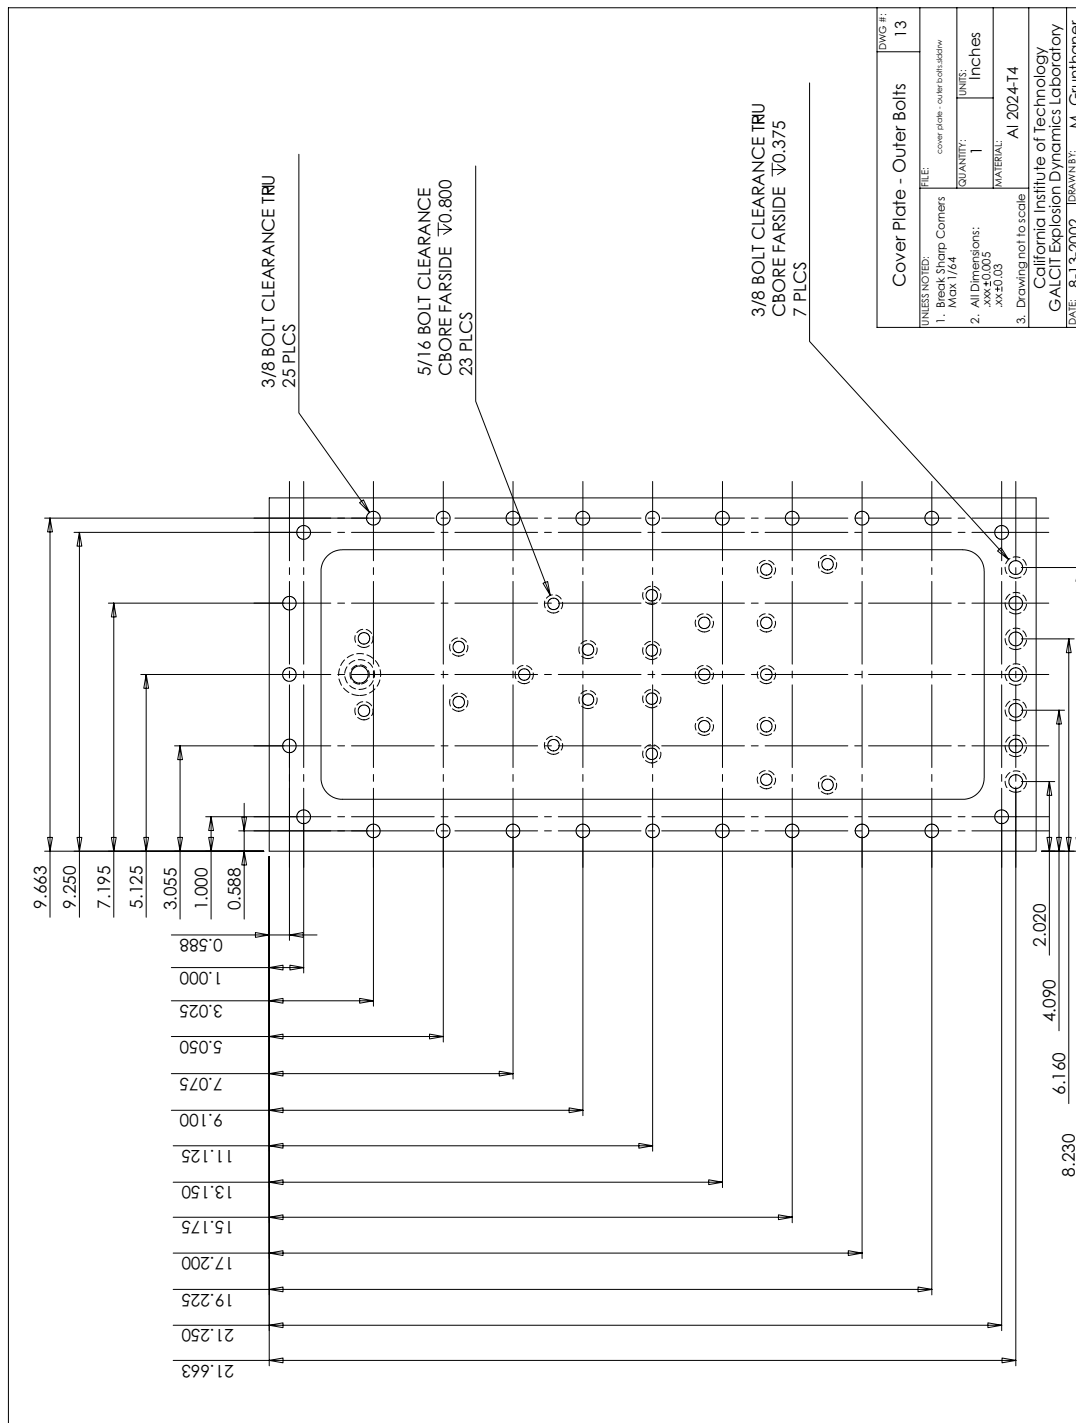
Cover Plate - Outer Bolts, Dwg No. 13
